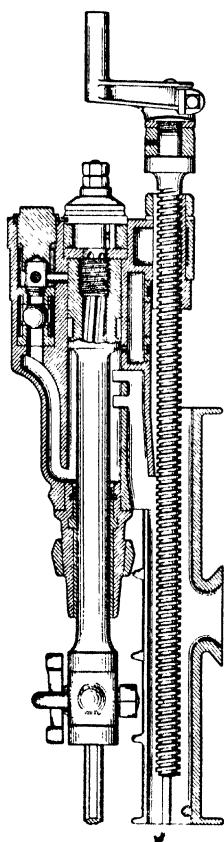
"Chicago Gatling" Drill. Chicago Pneumatic Tool Co.
